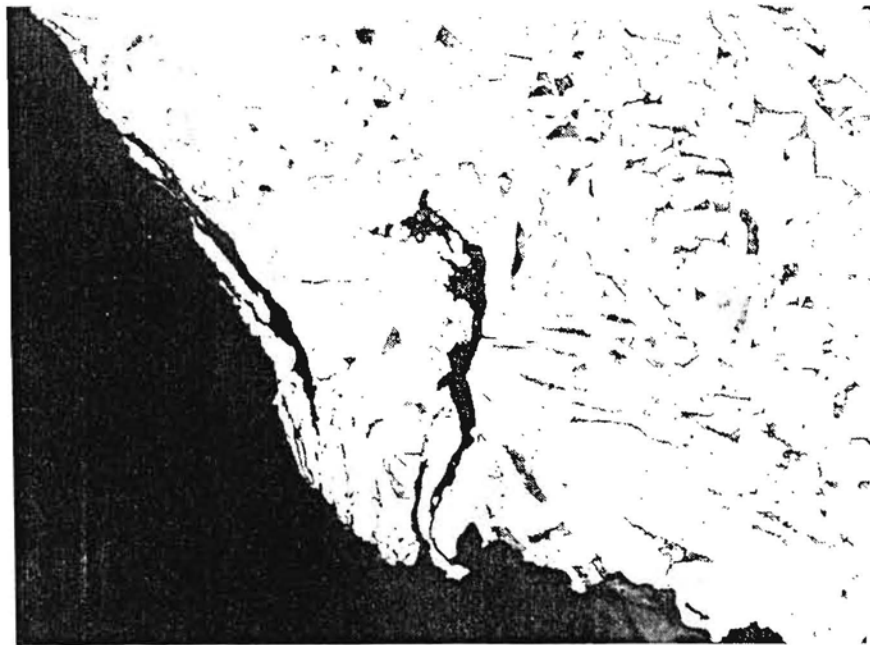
ENLARGEMENT OF CRACK AT WELD TOE OF SECTION A
